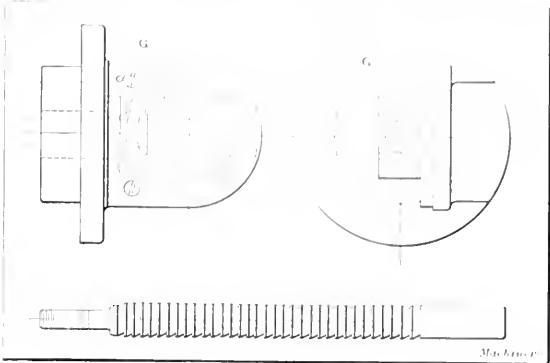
Broach and Fixture used for broaching the Four Holes in the Forgings
